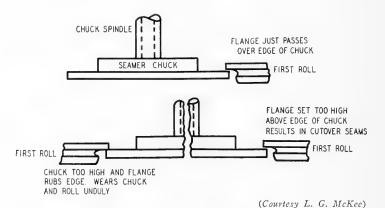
Adjustments for the can sealing machine. Above, correctly adjusted first operation roll. Below, Incorrectly adjusted first
